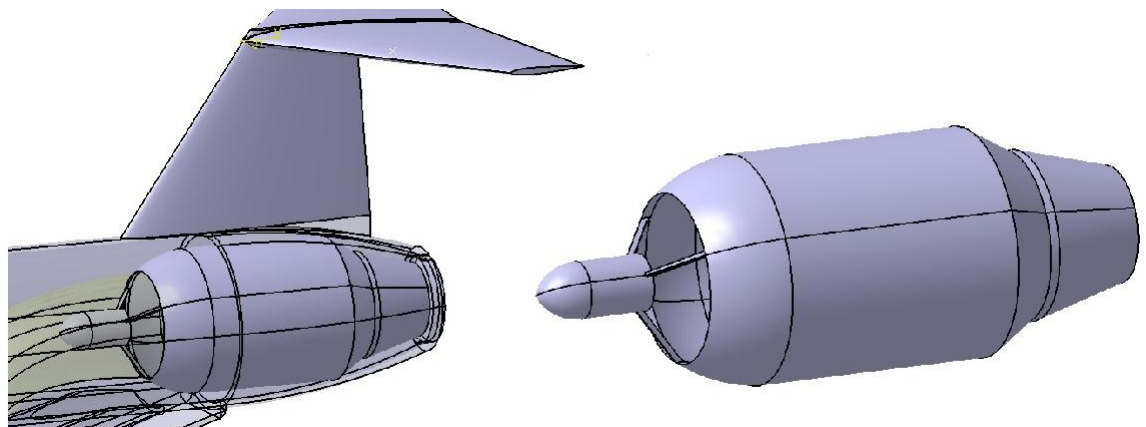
Nike Jet Engine CAD Drawing and installation to the UAV Model
